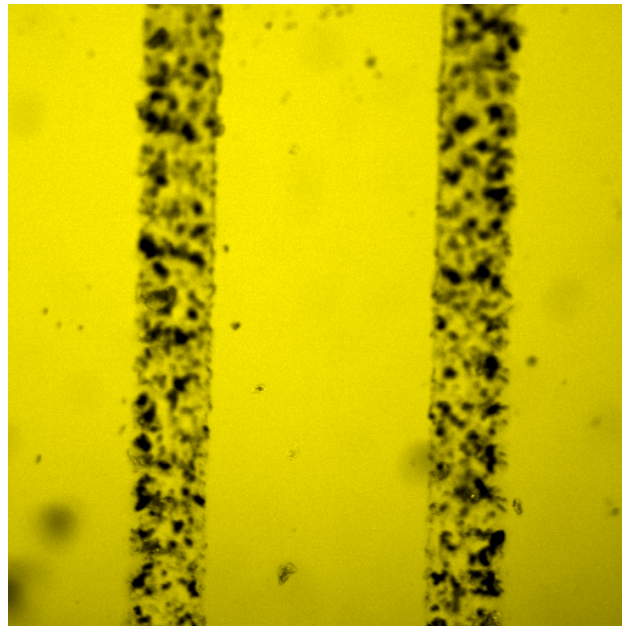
Cutting tool machined the PMMA to the glass surface: Side view. Image is upside down from confocal microscopy. Cut speed at 3000rpm and 3 times machining.
